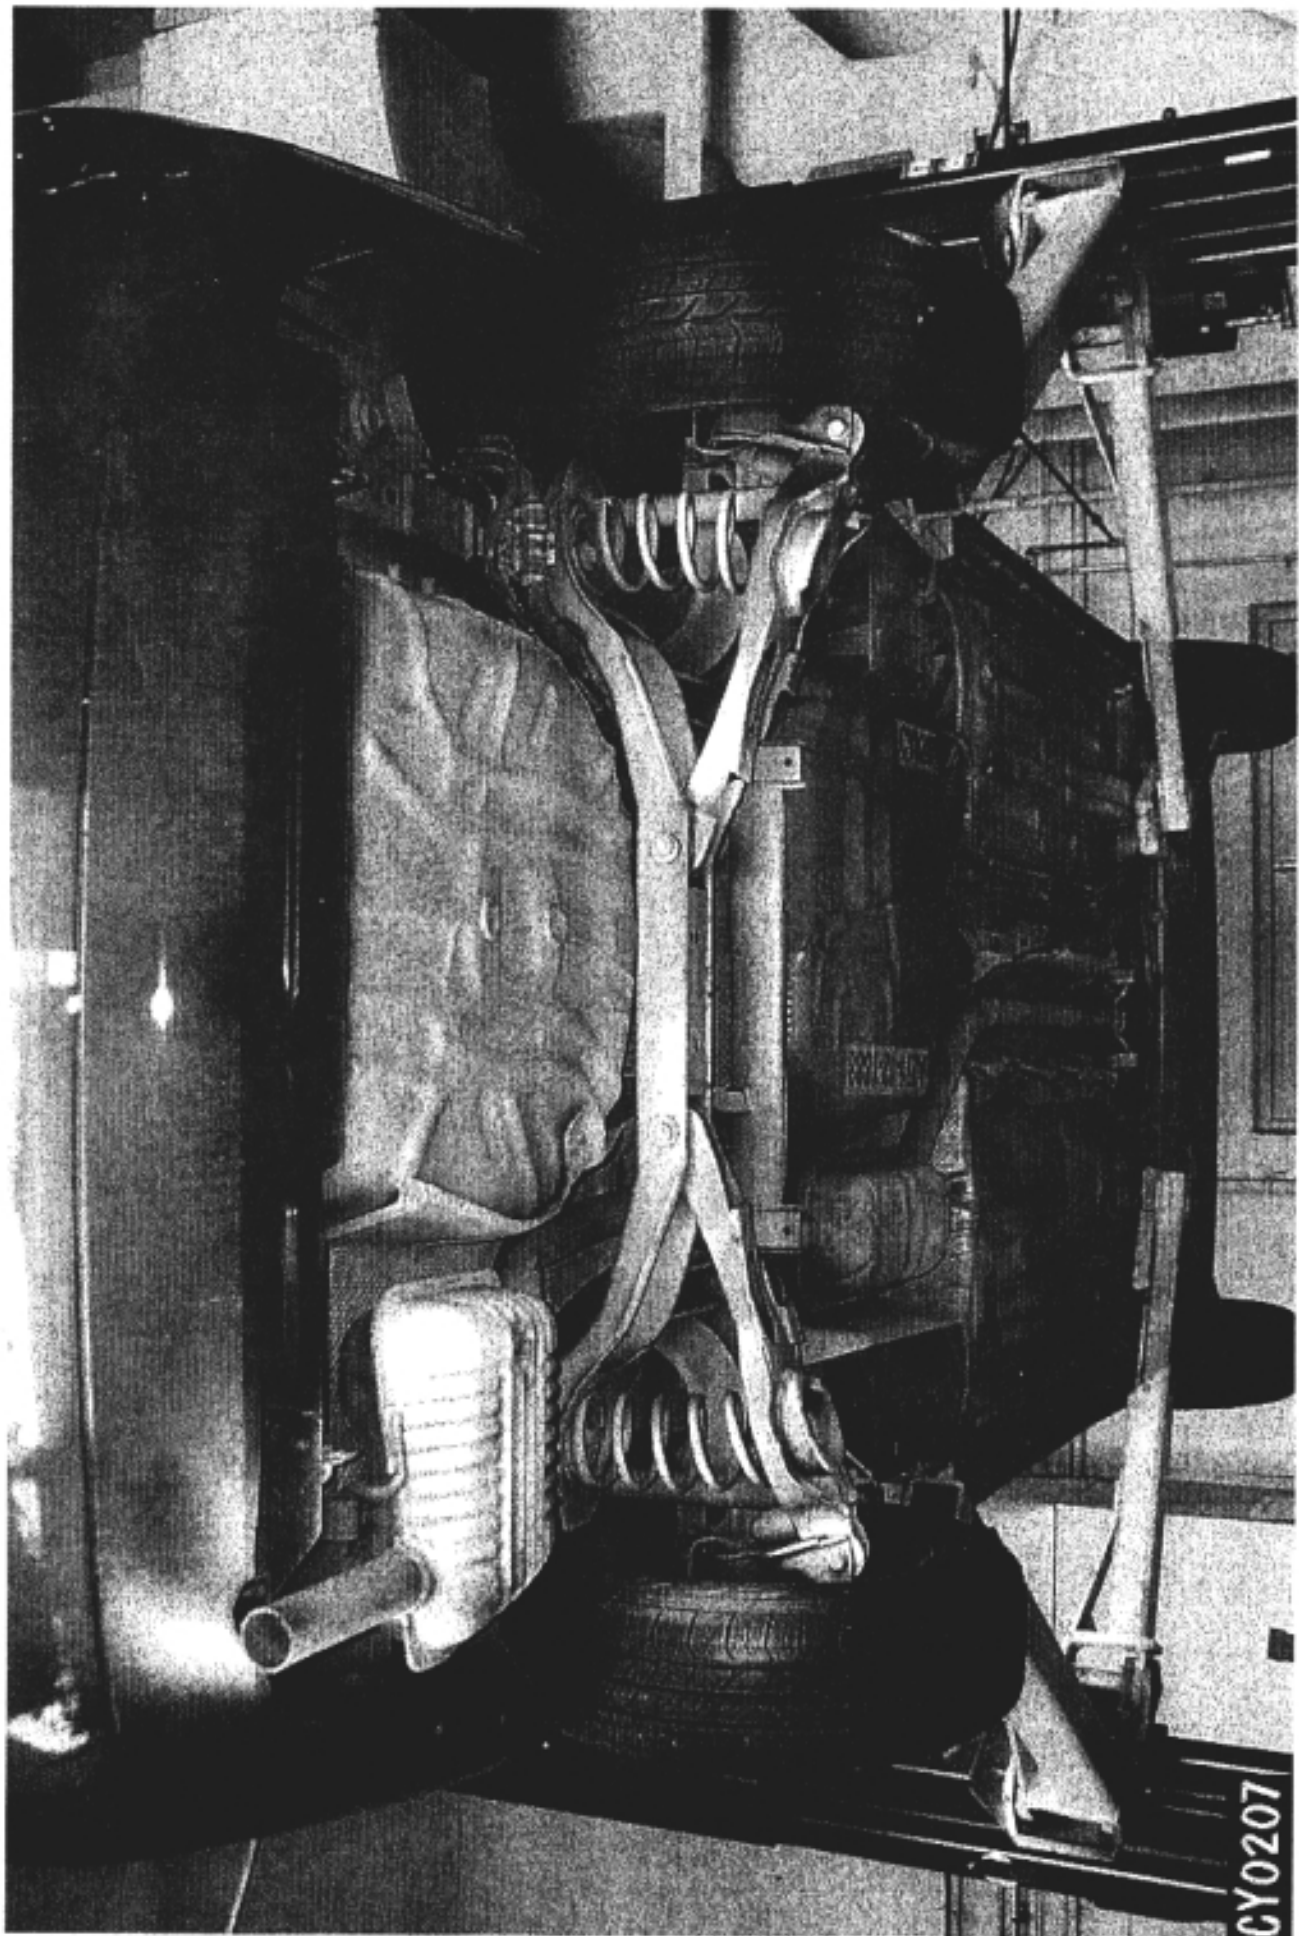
PRE-TEST REAR UNDERBODY VIEW
